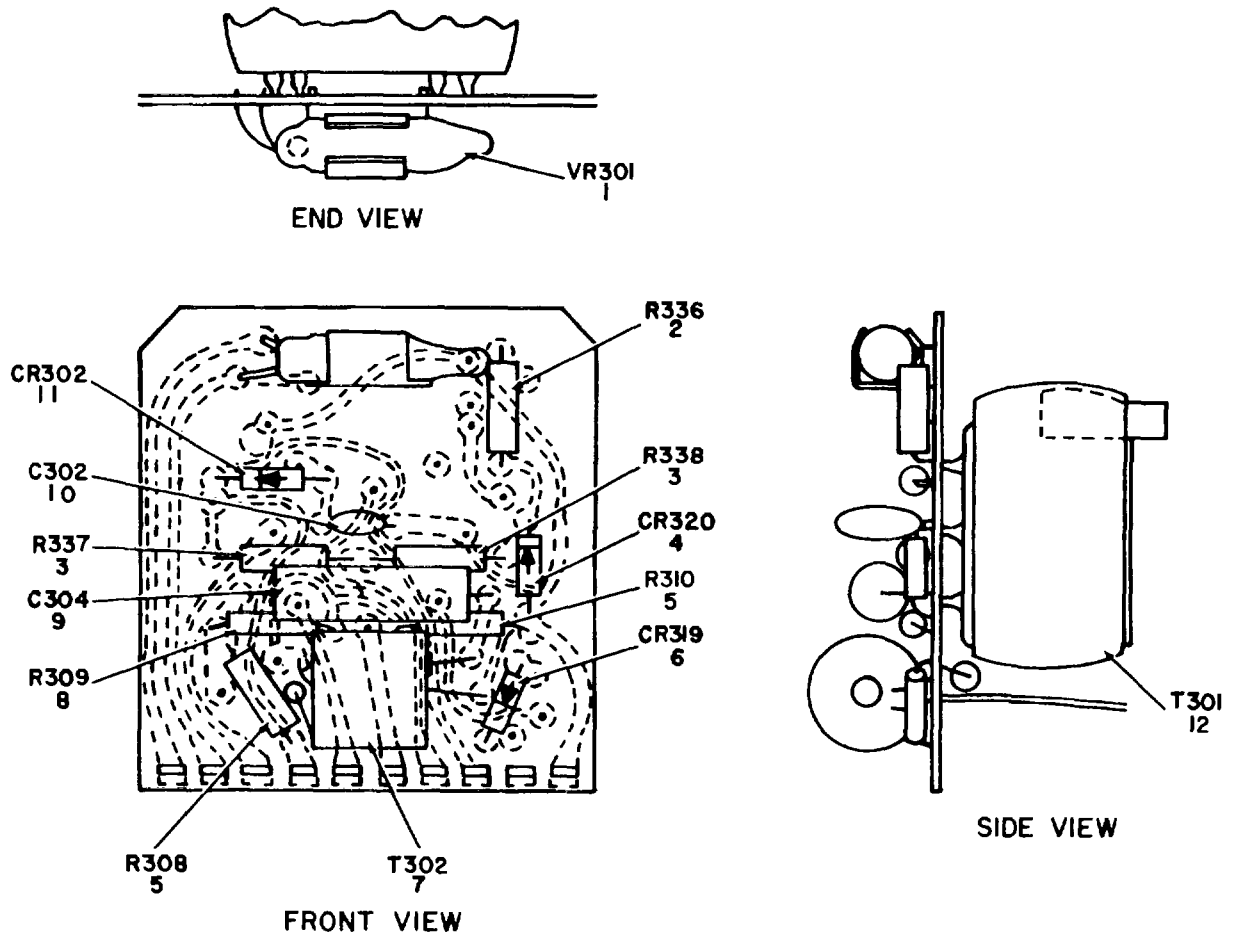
Strobe Assembly, Model 700, Circuit Card Assembly No. 1.
